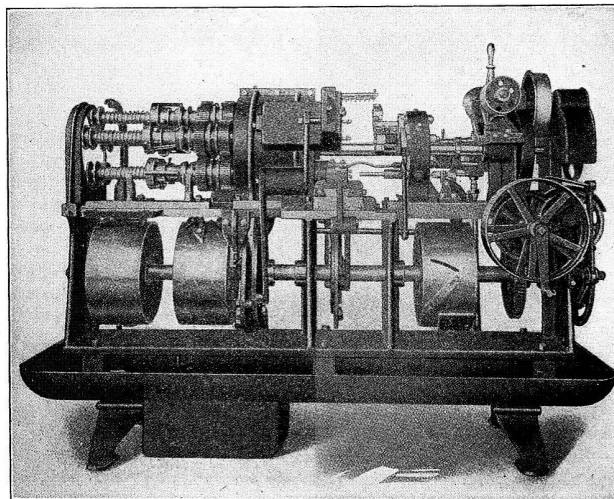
Universal Multiple-Spindle Automatic Screw Machine
